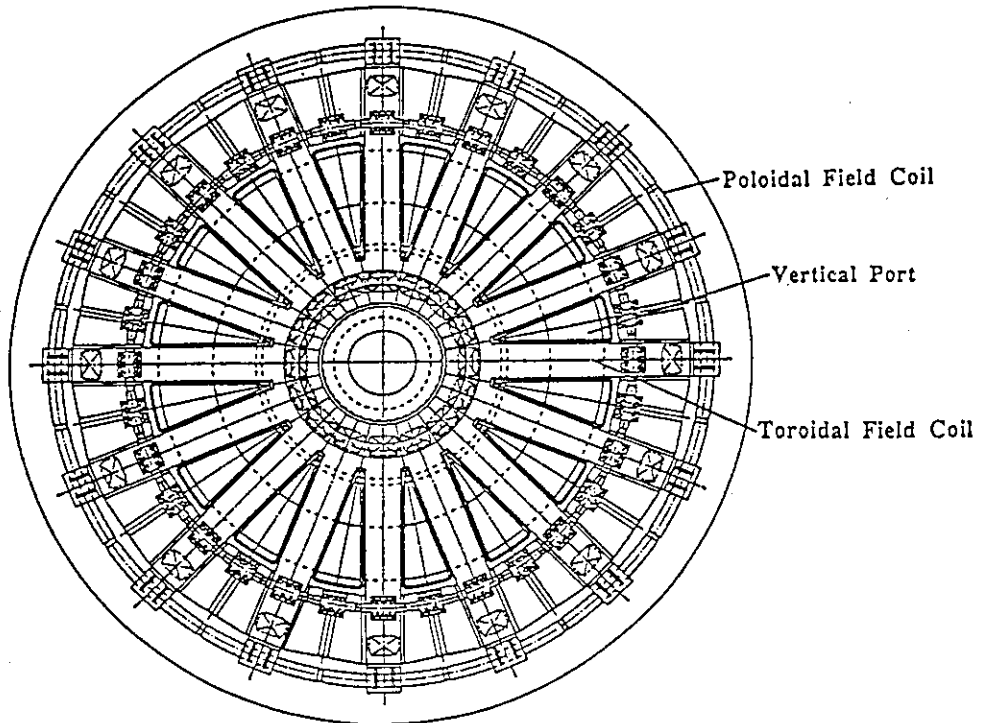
Top view of the SSTR tokamak machine.
